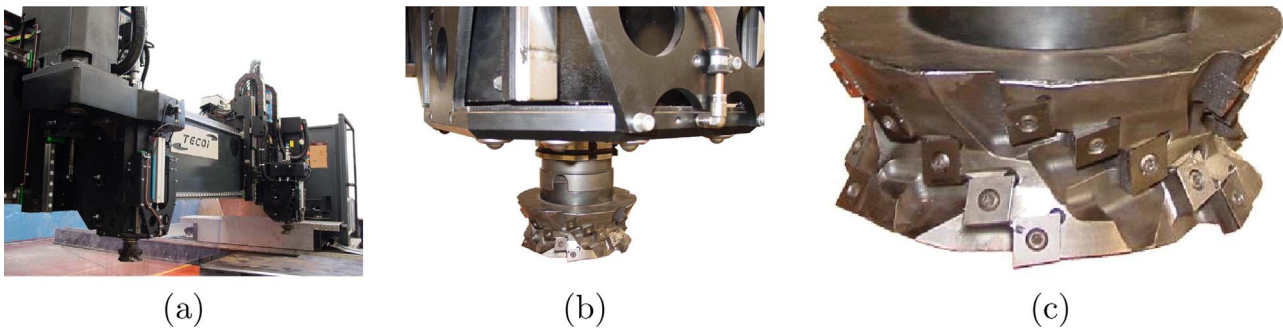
Machine tool for machining of metal poles of wind towers. (a) General view. (b) Detail of the milling head. (c) Close-up of the milling head. The rhomboidal inserts are fastened with screws.
